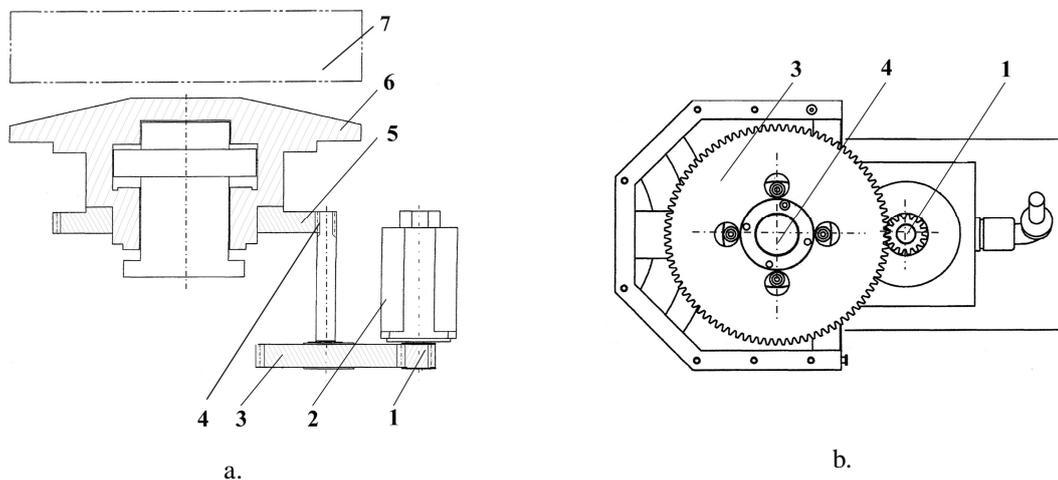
General structure of the rotary table: a. block-scheme of the driving mechanism; b. bottom view of the driving mechanism.
